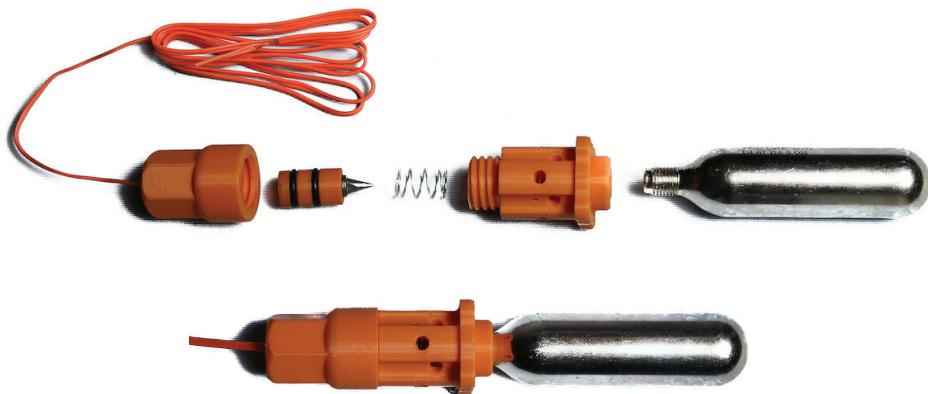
The final version of the 3D-printed parachute ejection mechanism
